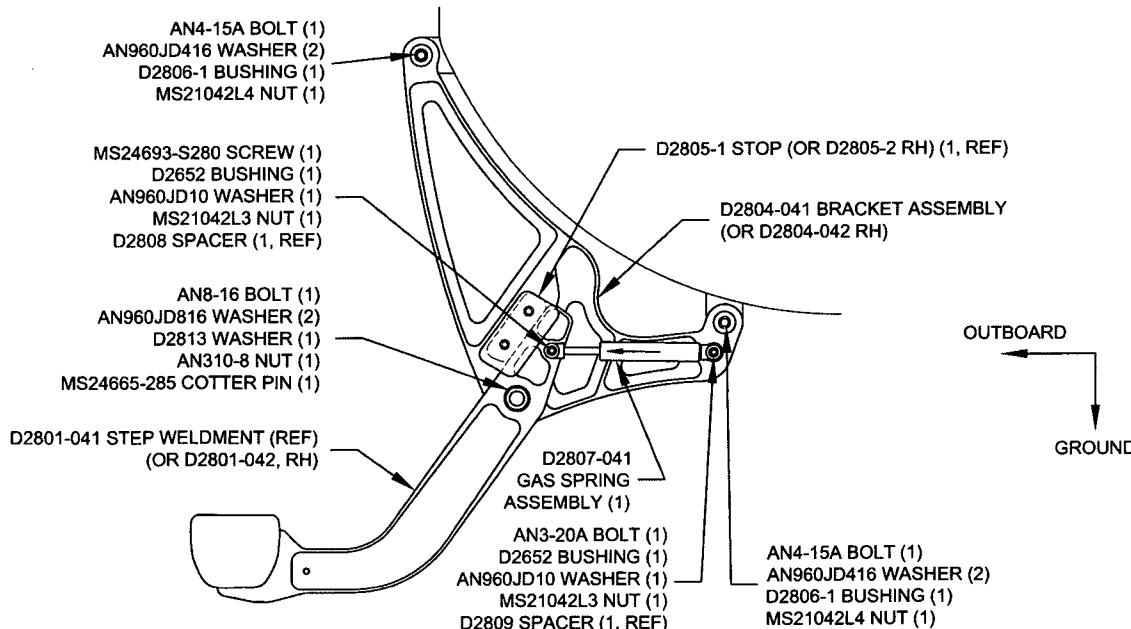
Strut Detail for D412-630-011/-012 Heli-Access-Step™ Installation
